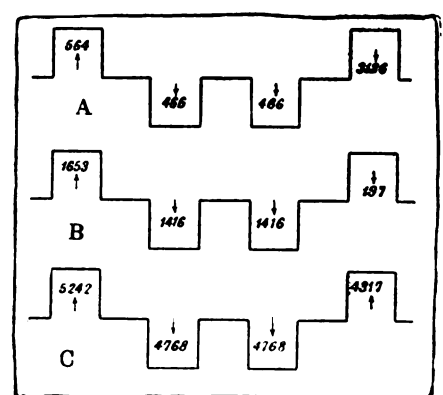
Forces acting on crankshaft (as in Fig. 1) when motor is throttled to 1/4 power, though running at full speed.
